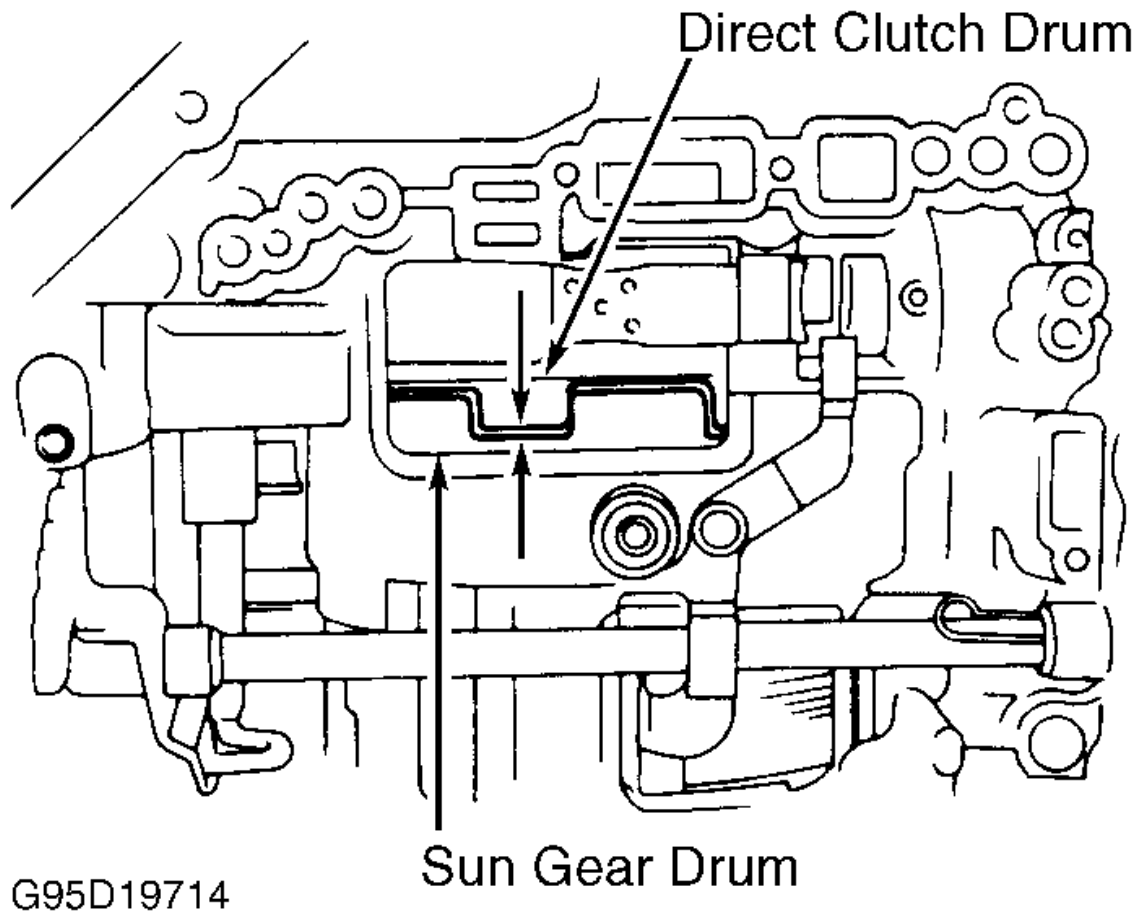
Checking Direct/Forward Clutch Drum Assembly Installation
